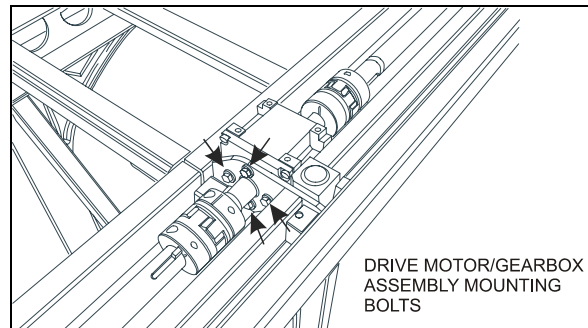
DRIVE MOTOR/GEARBOX ASSEMBLY MOUNTING BOLTS
